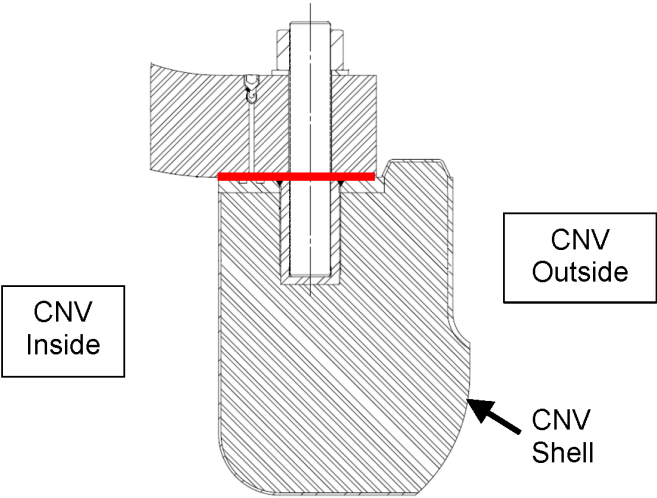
Control rod drive mechanism access (CNV25) flange and cover bolted opening
